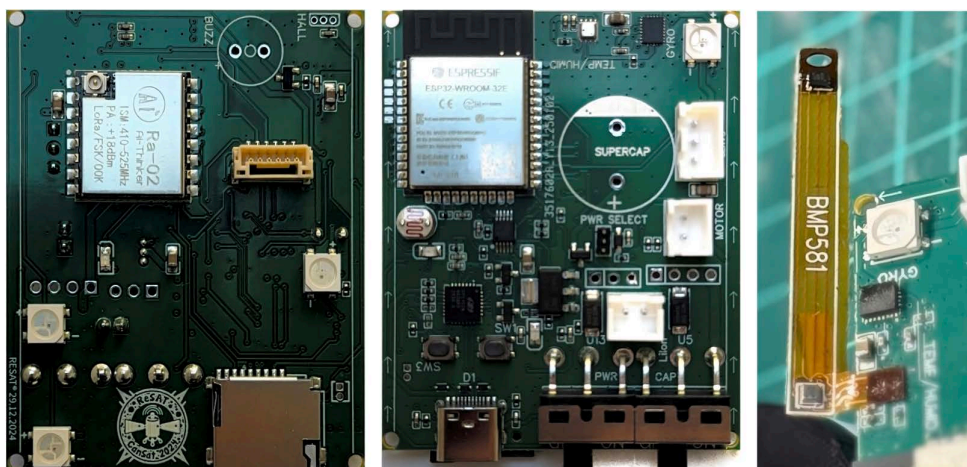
Pictures of both sides (a),(b) of PCB board and flexible PCB (c)
